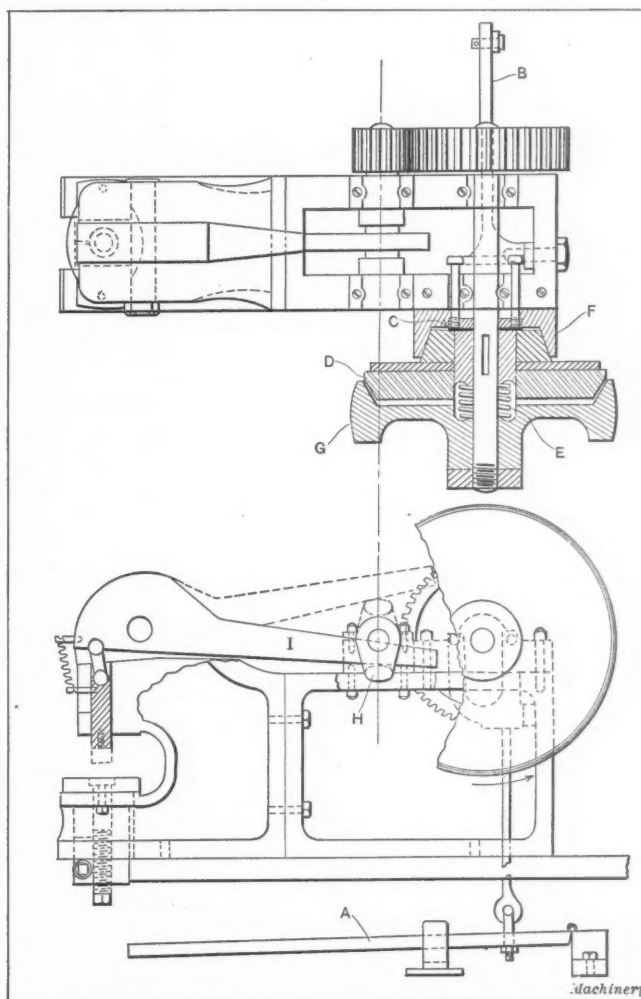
Special Power Press used for making "Vegetable Ivory" Buttons
